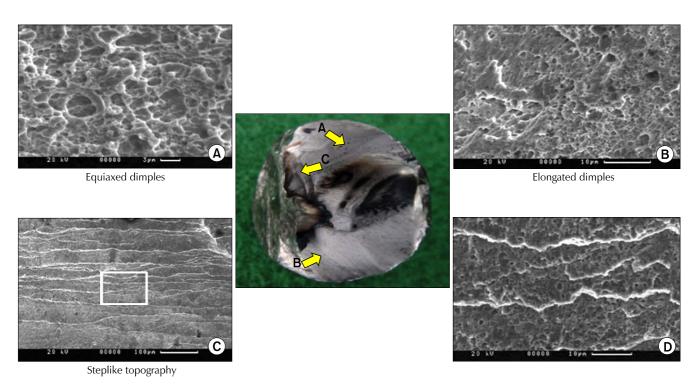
Higher-magnification view of fracture surfaces (Fig. 3 L/H) reveal dimple rupture and step-like topography formed by overload.
